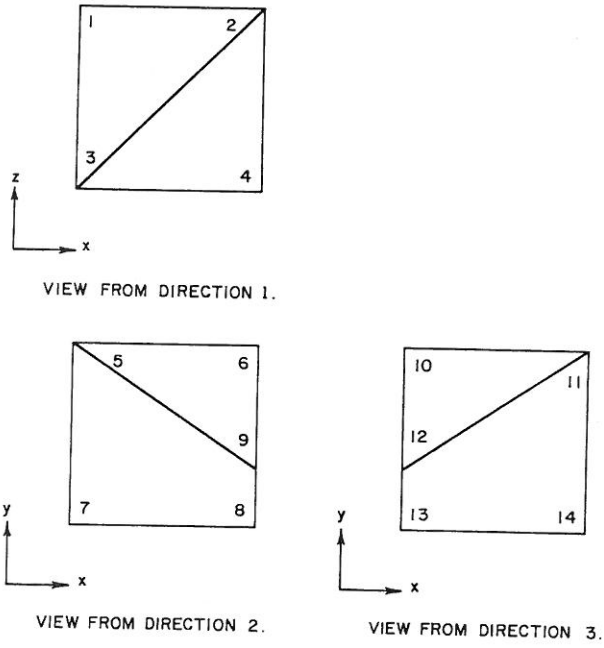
The three views of a three-dimensional object specified in the engineering drawing of Fig. 4a.
